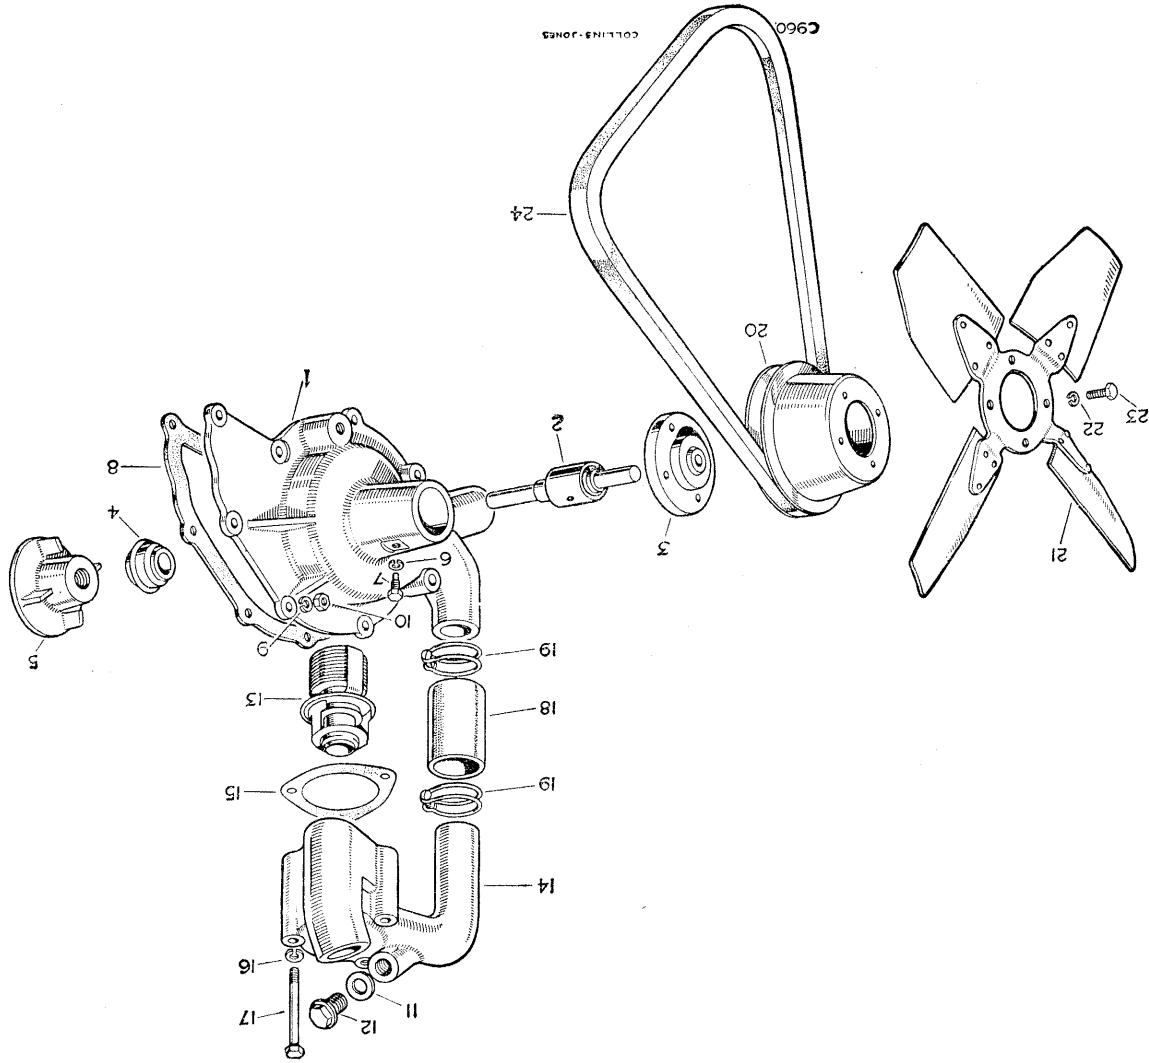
Layout of pump, thermostat and fan, $2\frac{1}{4}$ litre Petrol and 2 litre Diesel
